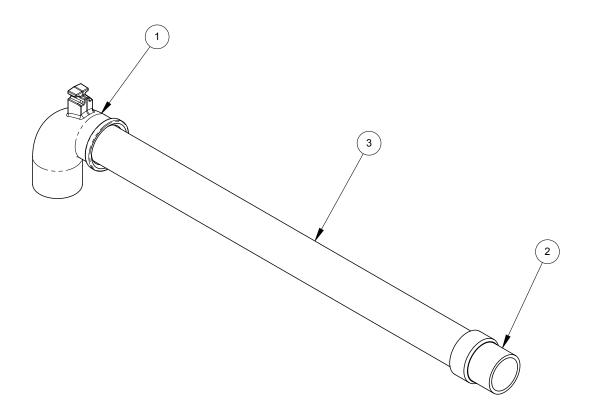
Edging Tool Assembly 000-163-151 Rev. C
